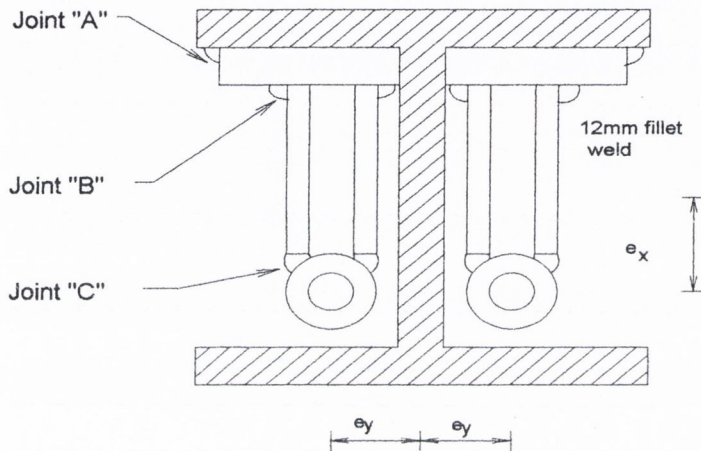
Weld joints A, B, and C considered in lever design.
